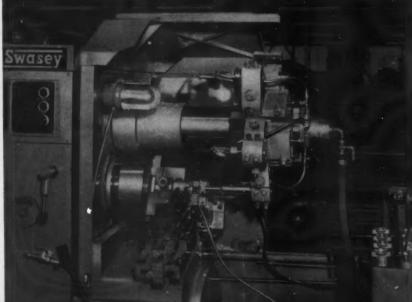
Special jaws on a twojaw, power-operated chuck are employed to hold small irregular-shaped castings in this single-spindle automatic chucking machine.
